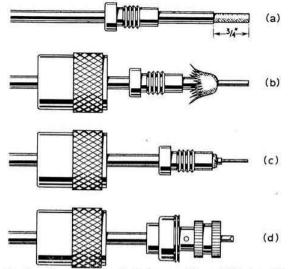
A temporary method of assembling a UHF plug with reducing adaptor.
